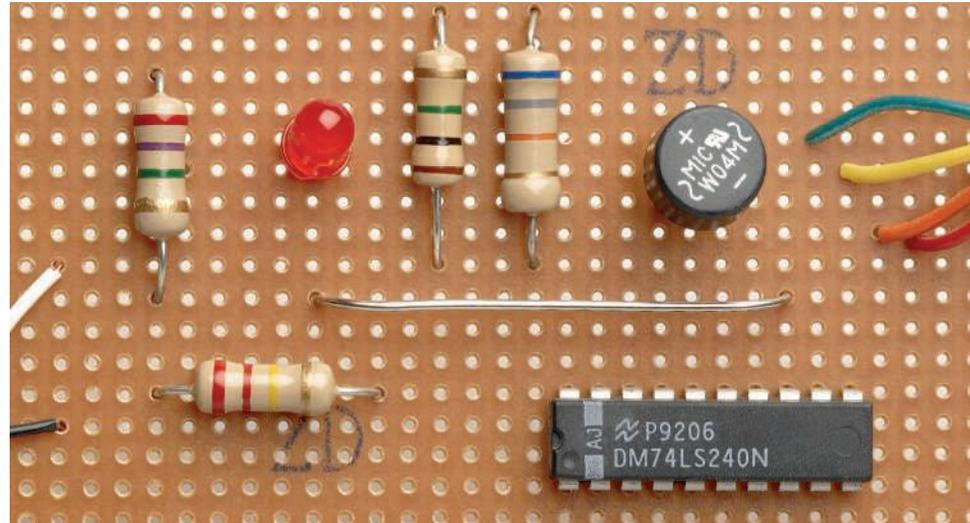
Breadboards are used for quick electronic prototyping.
